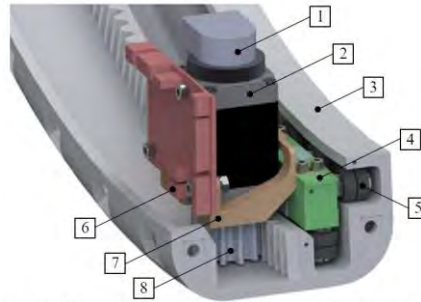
CAD model with basic parts: 1 – encoder, 2 – stepper motor, 3 – curved member with guide and gear rack, 4 – slide, 5 – ball bearings, 6 – motor controller, 7 – motor mount, 8 – bevel gear wheel.
